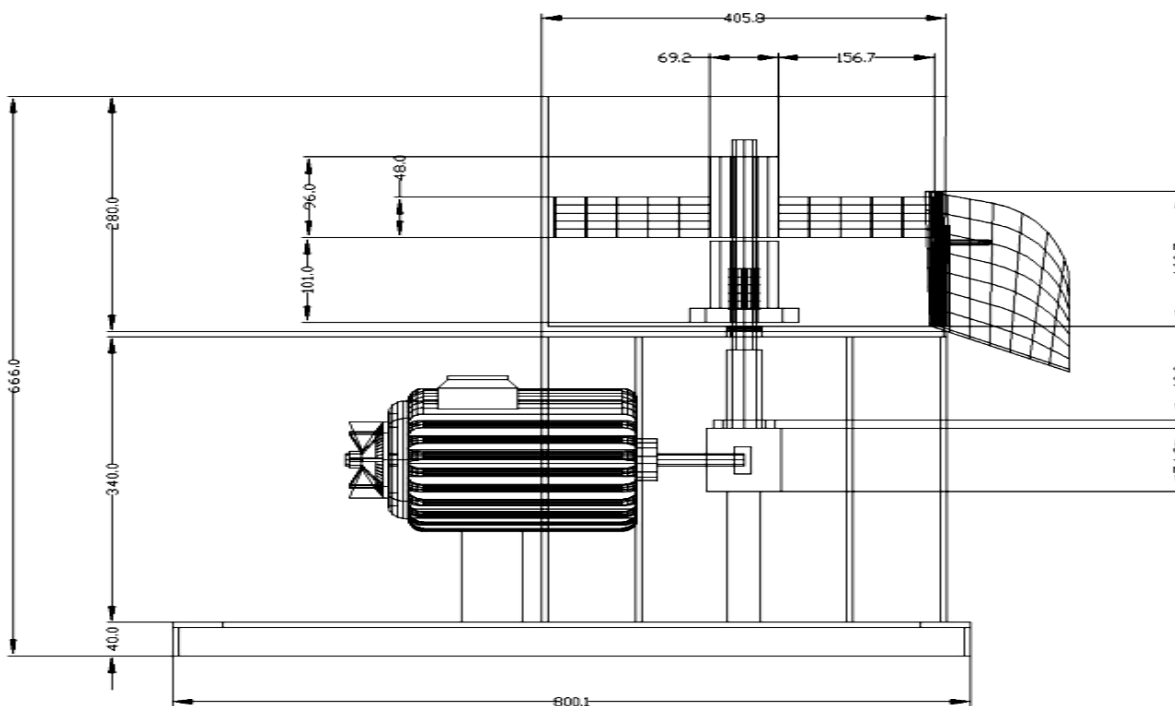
Side View of the Foundry Sand Mixer (All dimensions are in mm)
